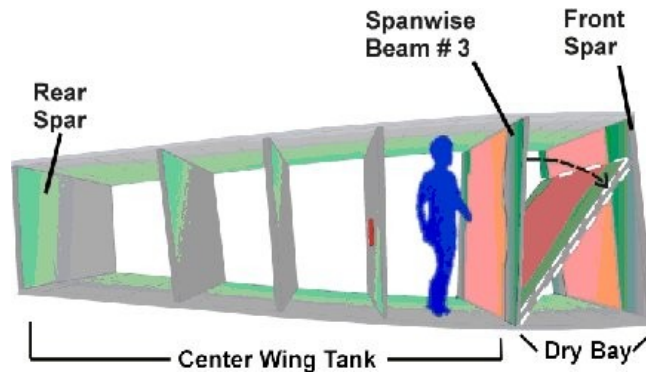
An NTSB image of the center wing tank, showing how its front wall failed.²
